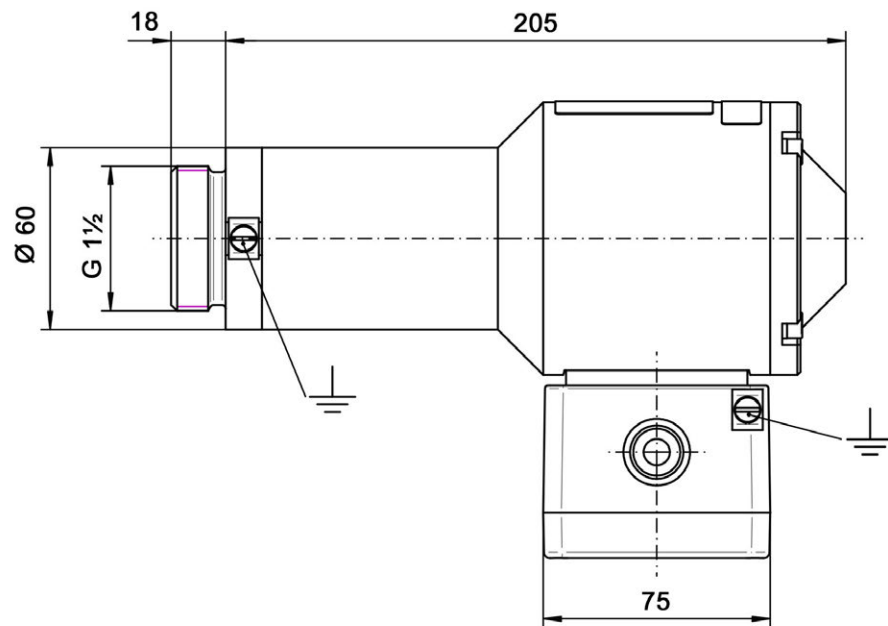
Dimensional drawing compact flame scanner F200K Ex (for Ex zone 1, 21), with connection area
